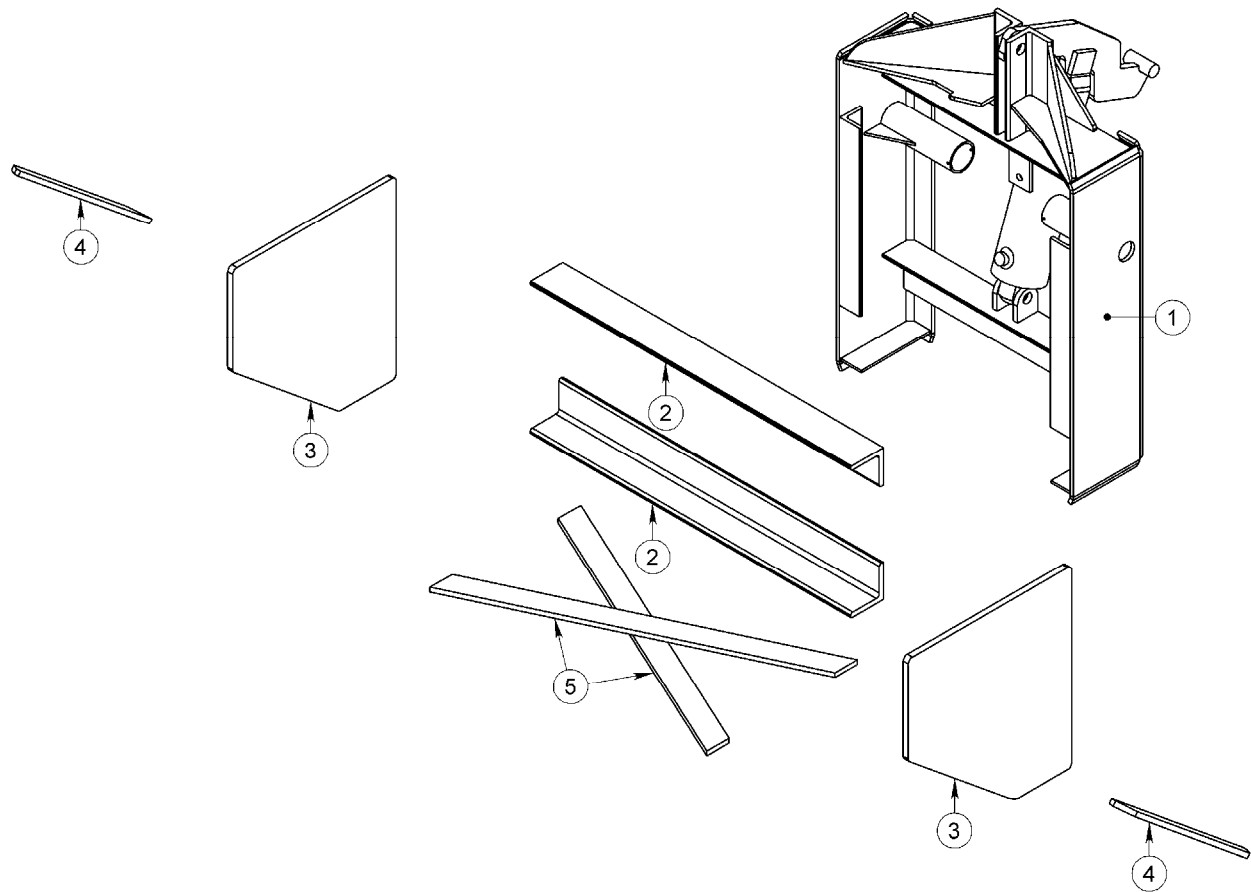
Typical Sideplate Attachment, Parts View
